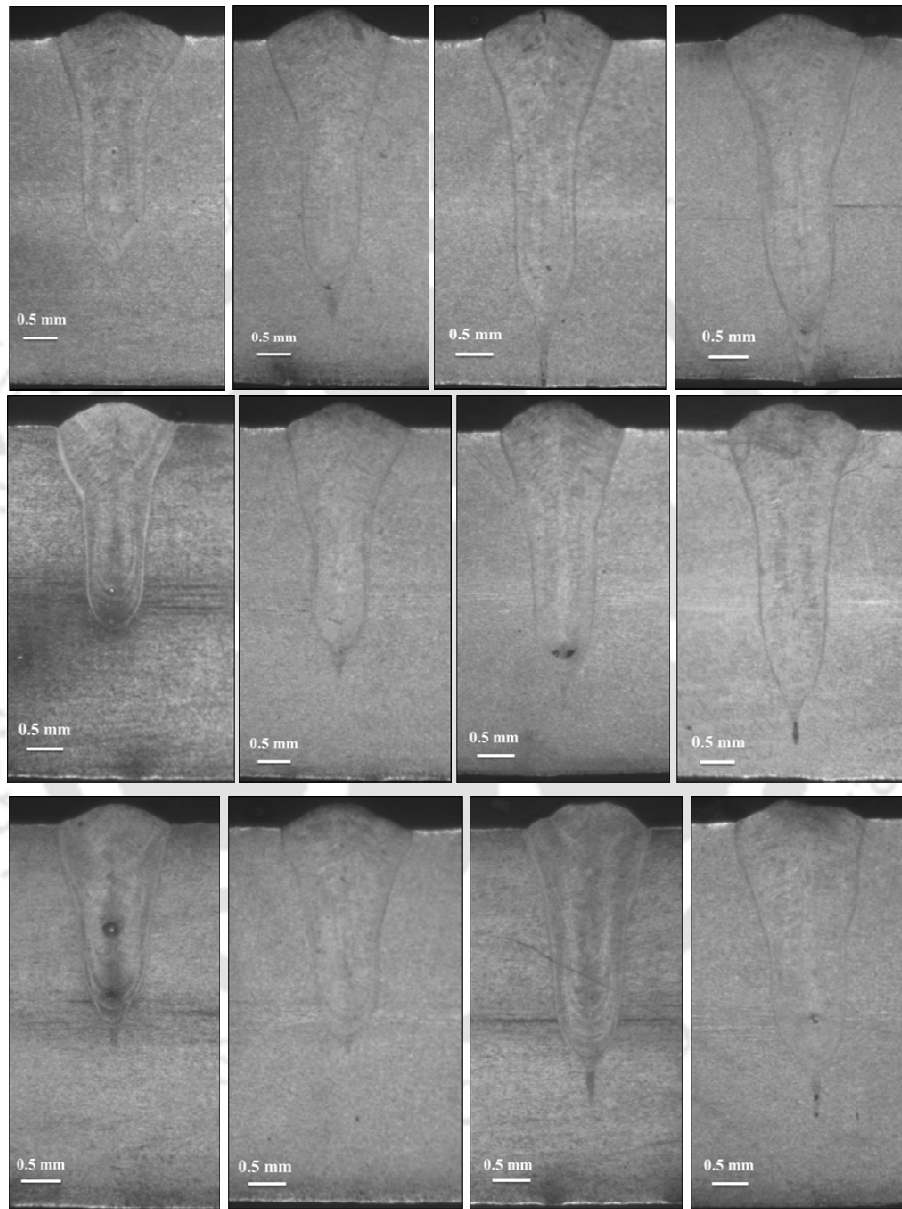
Experimental weld macrographs for welds in open atmosphere corresponding to welding conditions given in Table 4.4 of SS 304, 5 mm thickness plate.
